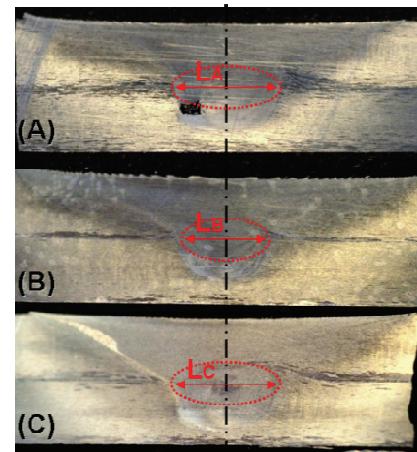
Macro observation of the transverse sections of welds obtained with $R = 700$ rpm and the (A) T1, (B) T2, and (C) T3 tool respectively
